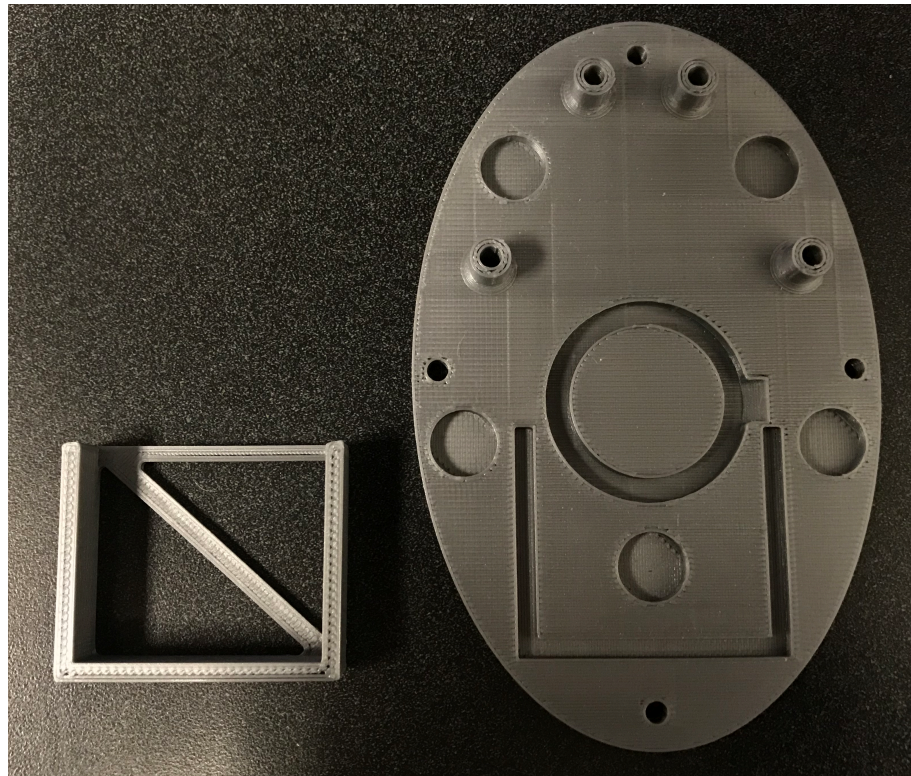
[Right] Version A baseplate 3D printed with interference fit locations for magnets, inductive coil, and heat-set threaded inserts. Slip fit pattern for battery gate. [Left] 3D printed battery gate designed to retain battery on Baseplate.
